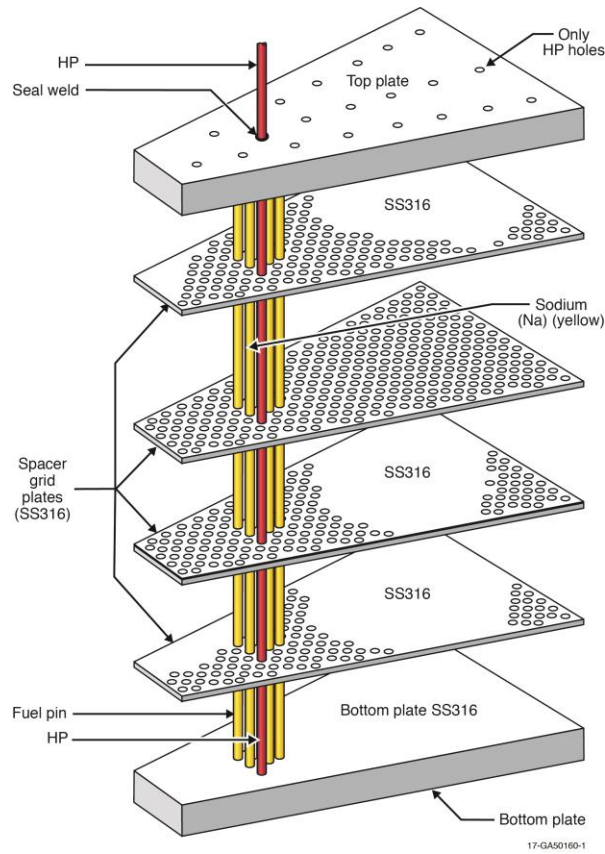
Design B fuel pin and heat pipe arrays inside the inner tank.
